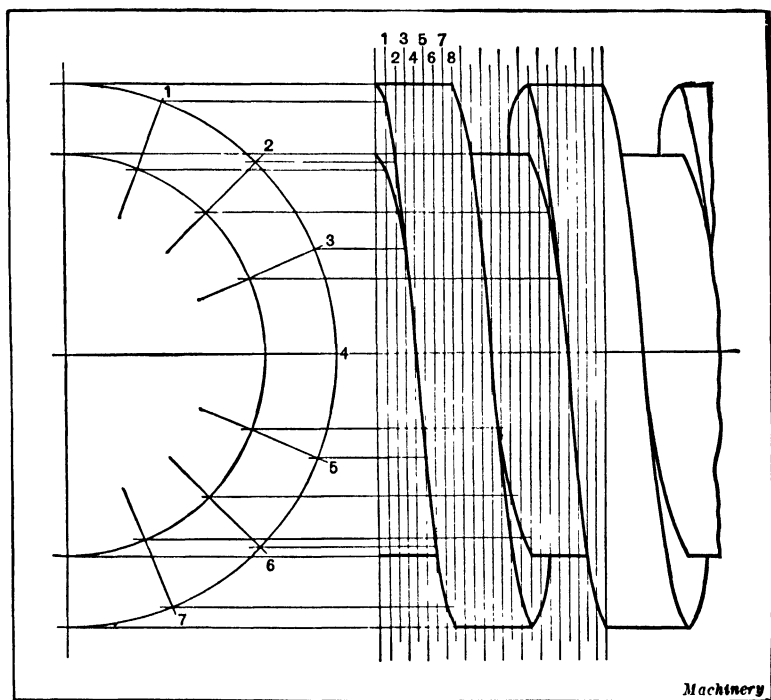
Representing a Large Square Thread by drawing Accurate Helical Curves
